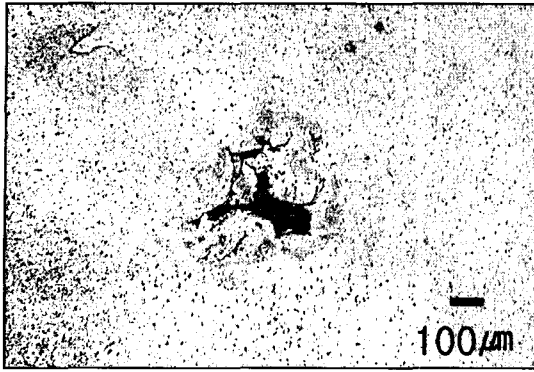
Welding defect of FSWed aluminum alloy plate
